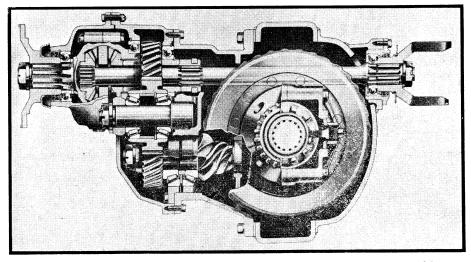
Timken single reduction axle with inter-axle differential and through drive
